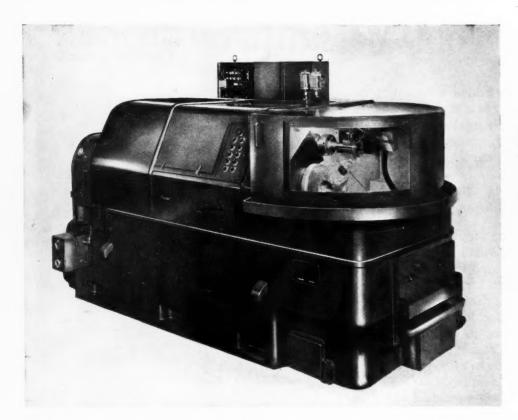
Sundstrand Fin Milling Machine Equipped with Electronic Feed Drive to Automatically Hold Full Load on the Spindle Motor. Production was Increased by 35 Per Cent with This Drive
